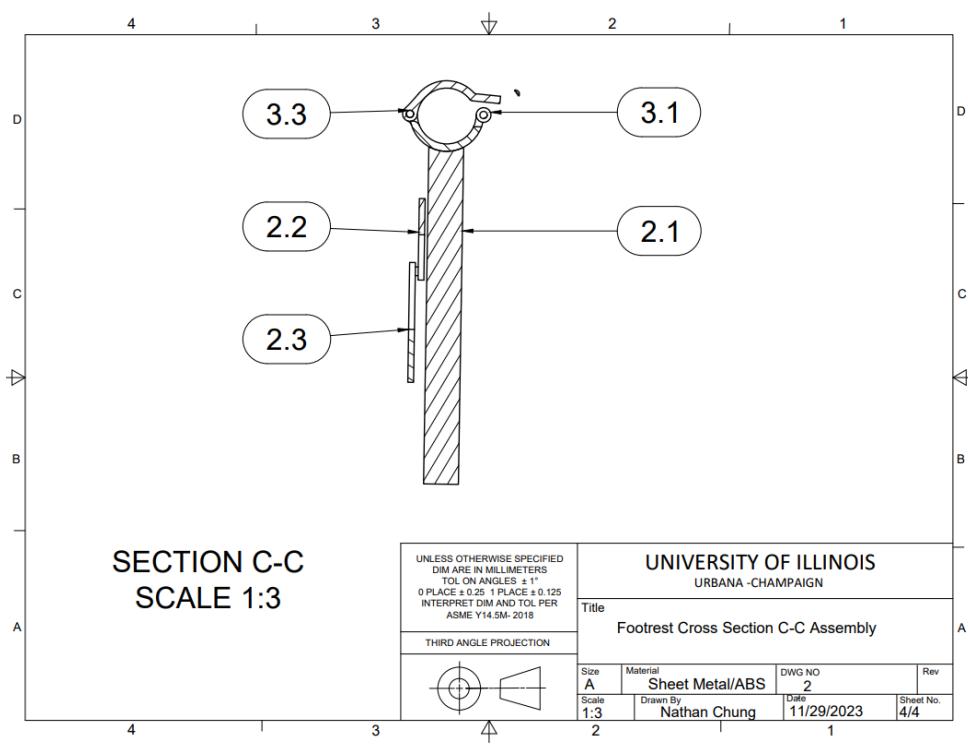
Footrest Cross Section Assembly Section C-C View Drawing
